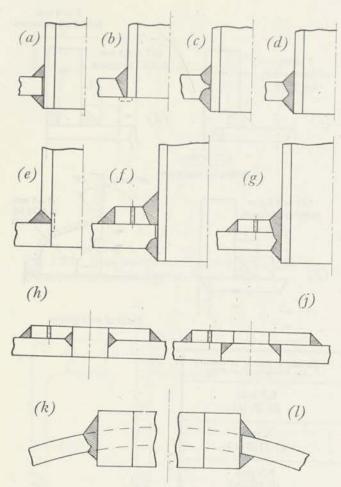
Typical Acceptable Methods of Attaching Branches and Pads
